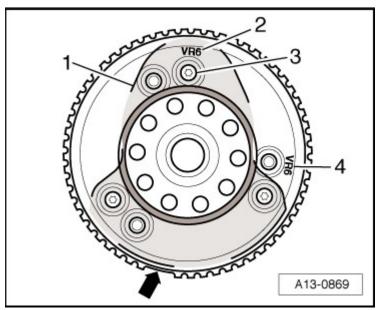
Identifying "VR6" Marking Positioned At Bore Of Bolt That Goes Into Crankshaft Crankpin Courtesy of AUDI OF AMERICA, LLC
